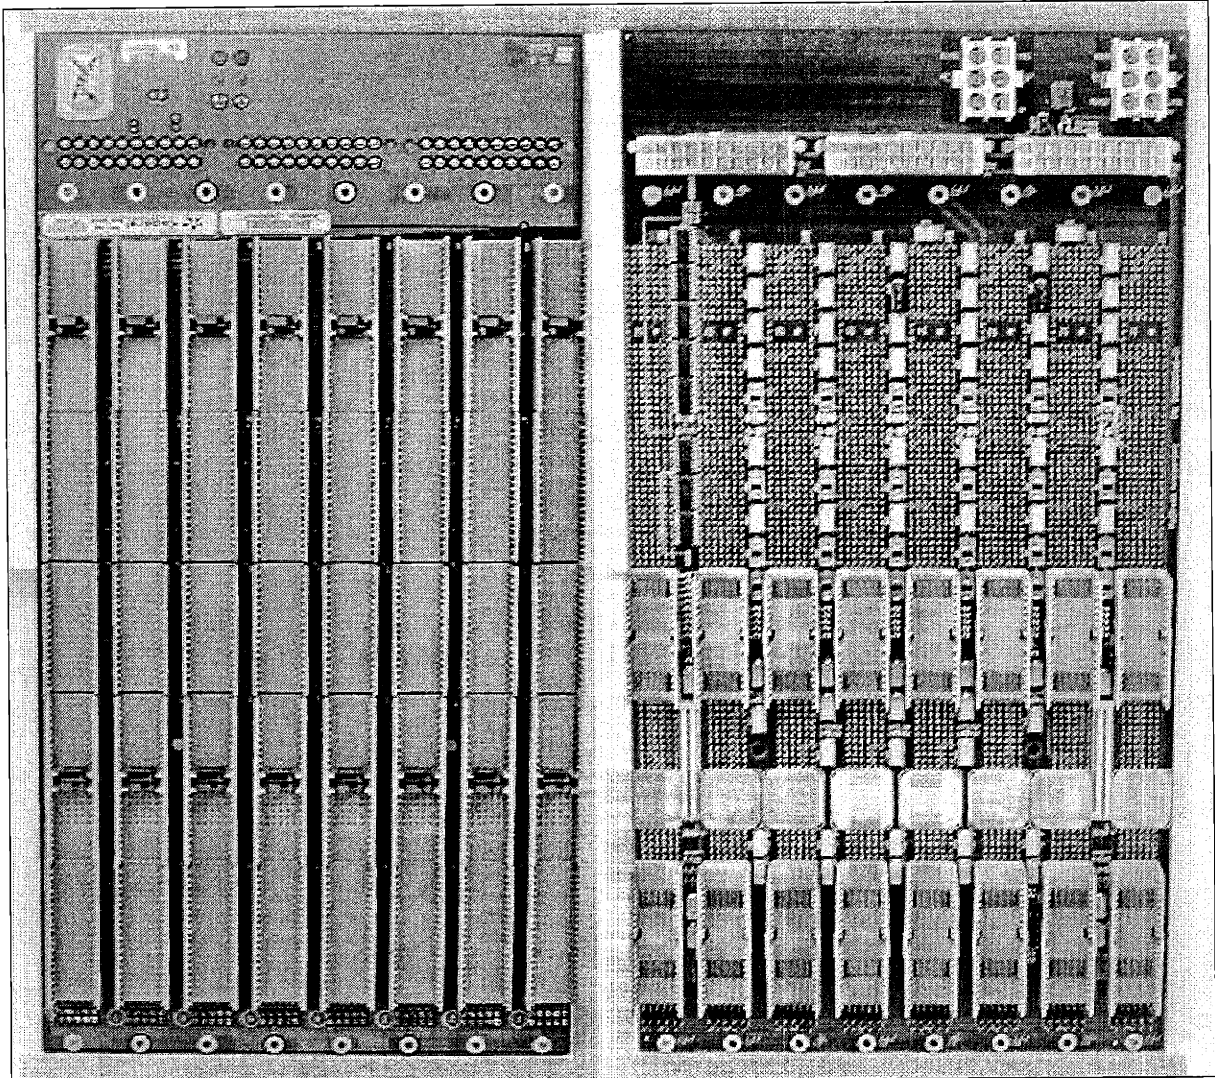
Front (left) and rear (right) views of the PS4400 backplane PCB.
